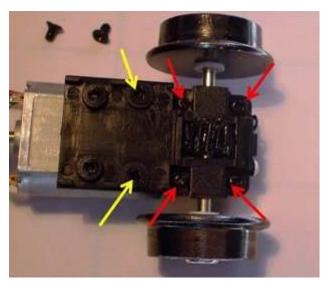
The motor-gearbox-axle assembly releases with the removal of two screws (shown) as described in text. On its underside are screws that hold the motor (yellow arrows) and gearbox (red arrows) to the assembly frame.
